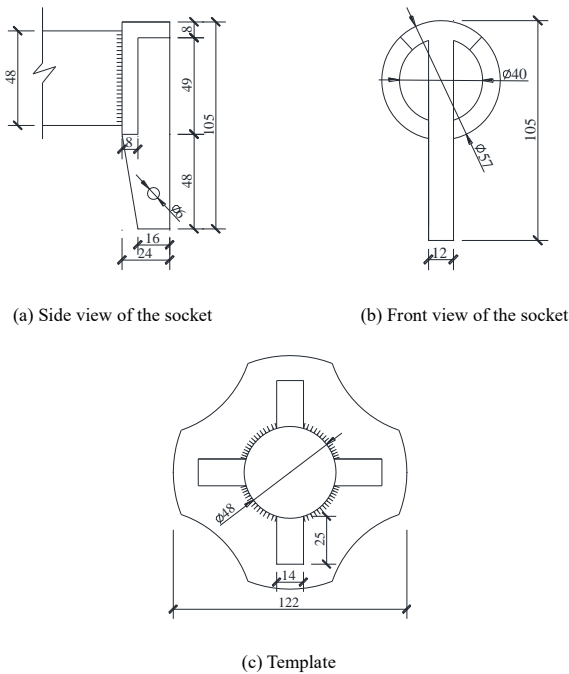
Geometrical dimensions of connection joints (all the dimensions in the figure are in mm).
